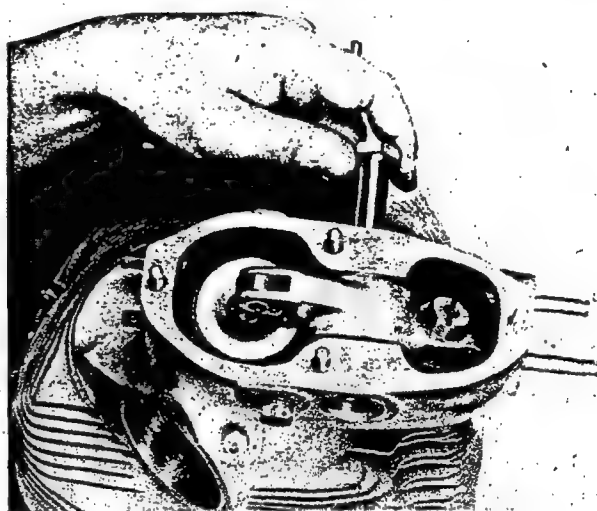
Removing or Installing Rocker Arm Hub Bolt
